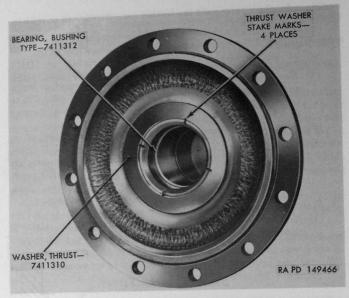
Steering knuckle bushing type bearing and thrust washer installed.
